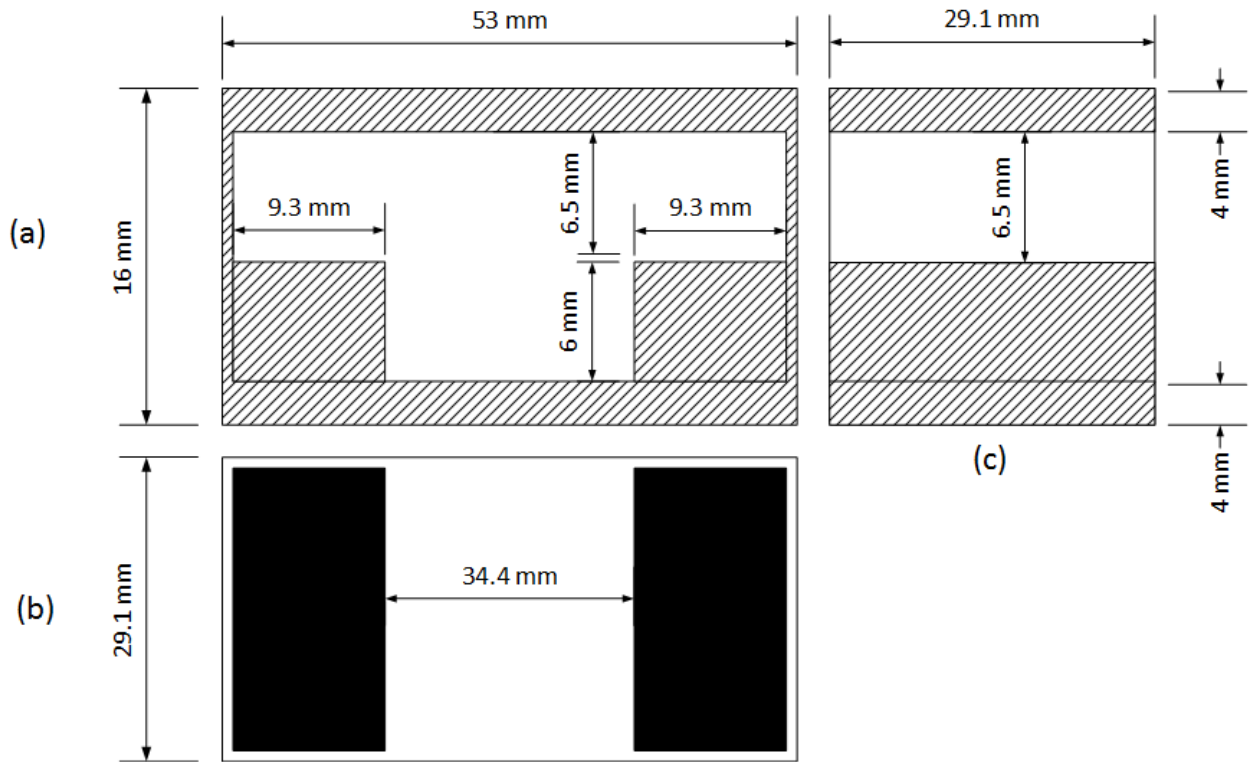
Aluminium Enclosure of the filter (a) Front cross section view (b) Top view (c) right cross section view.
